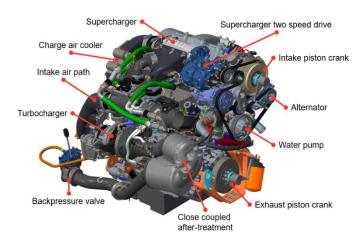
Isometric CAD view of the new 2.7L OP GCI engine
